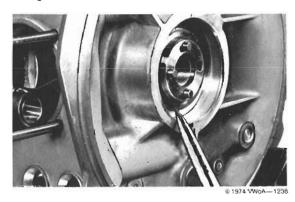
Scraper being used to chamfer edge of seal recess in crankcase. This will prevent damage to the seal during installation.
